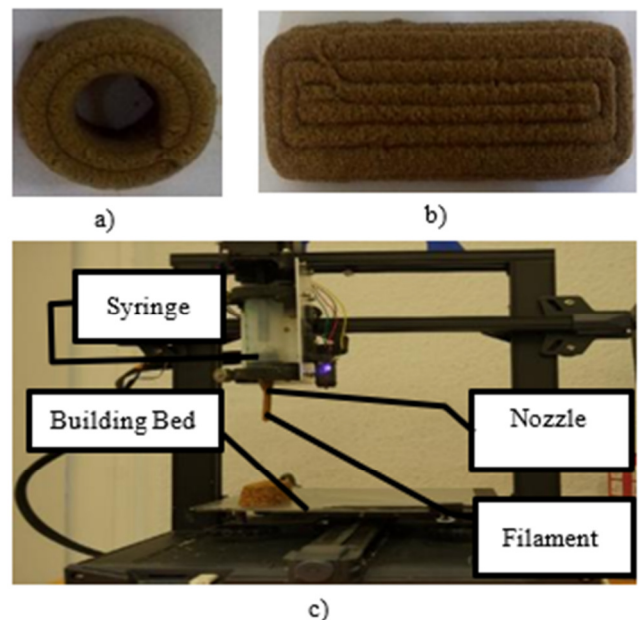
Printing process: (a) cylinder for compression testing, (b) rectangular bar for flexural testing, (c) paste extrusion machine during printing.
